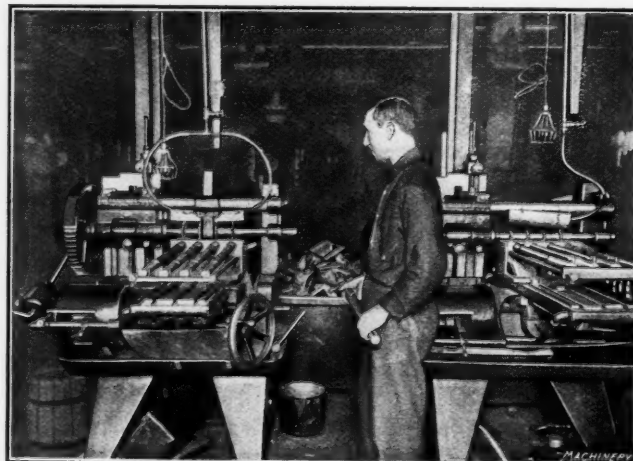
Keyseating Live Axle Shafts in Kempsmith-Lincoln Type Milling Machines
